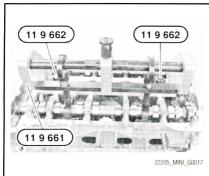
Screw special tool into exhaust camshaft spark plug holes
